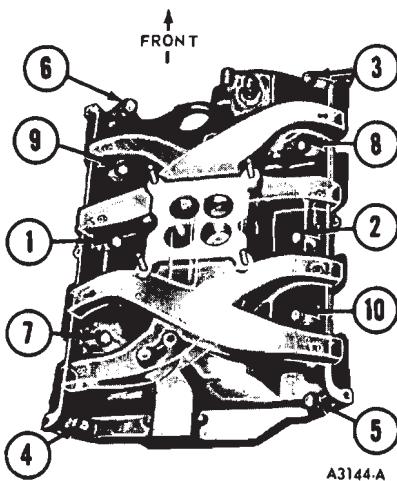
Typical Intake Manifold Assembly 390 and 428 V-8, Except 428 Police
